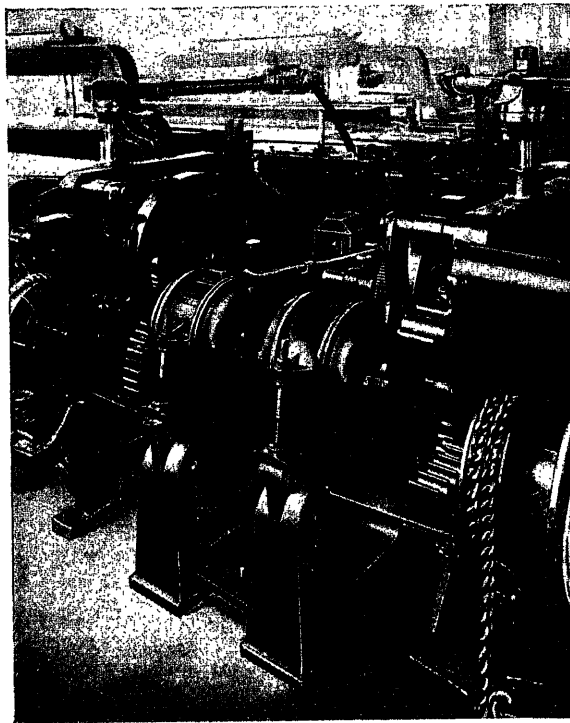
Loom motors with gears and slipping clutches, mounted upon looms.
